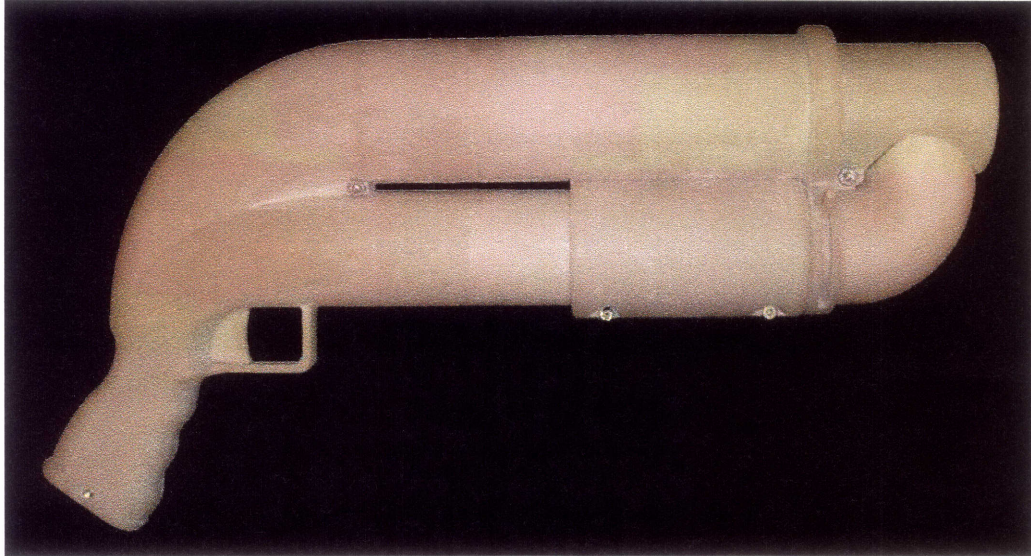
The assembled alpha prototype, which was created mostly using SLA.
